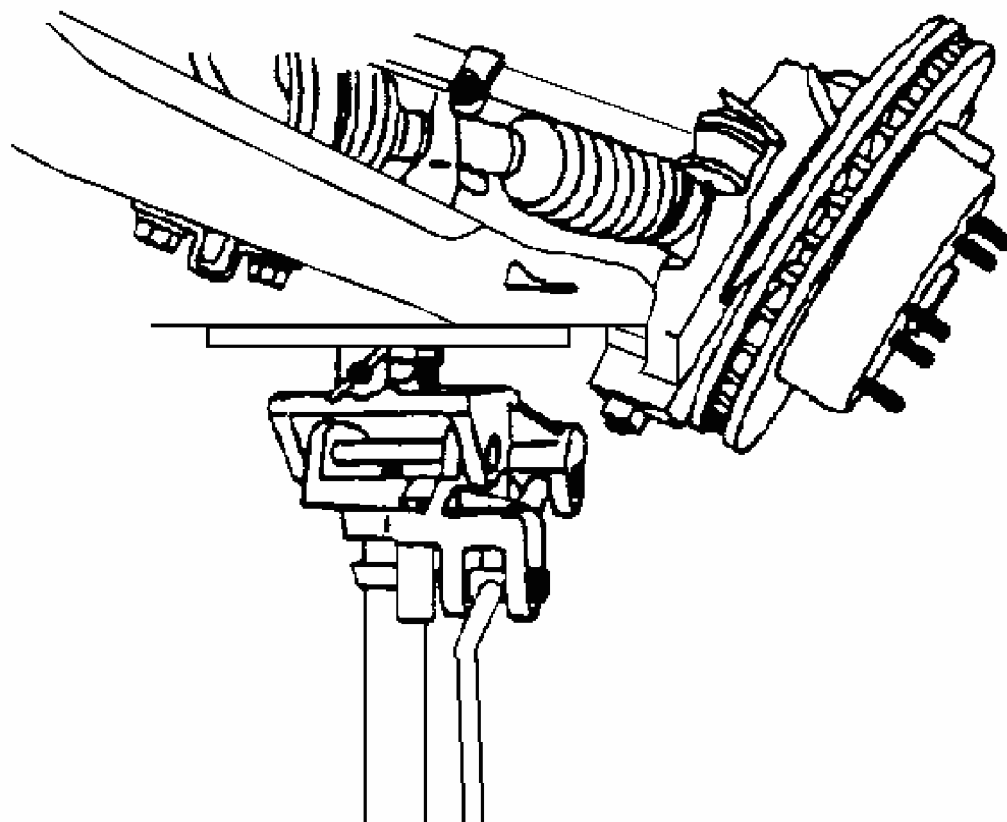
Positioning Safety Stand Under Lower Control Arm
